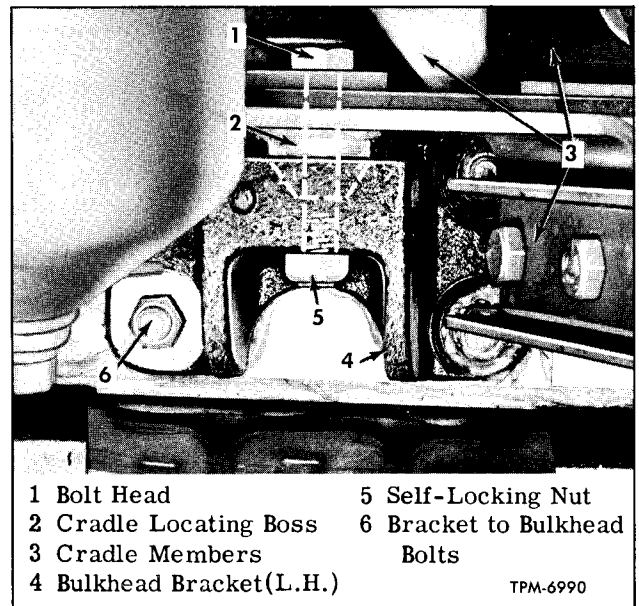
Construction at L.H. Cradle Bracket at Bulkhead
